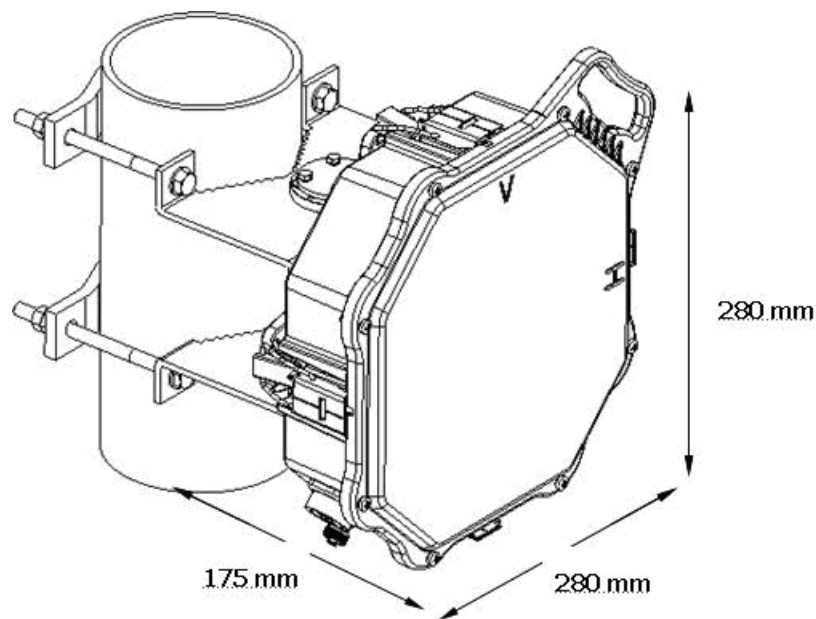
Pole mounting assembly for ODU not integrated to antenna
